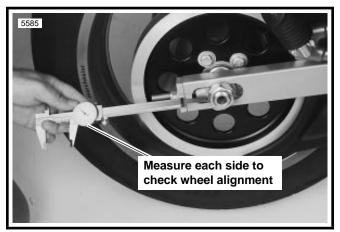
Checking Rear Wheel Alignment, Right Side Shown
